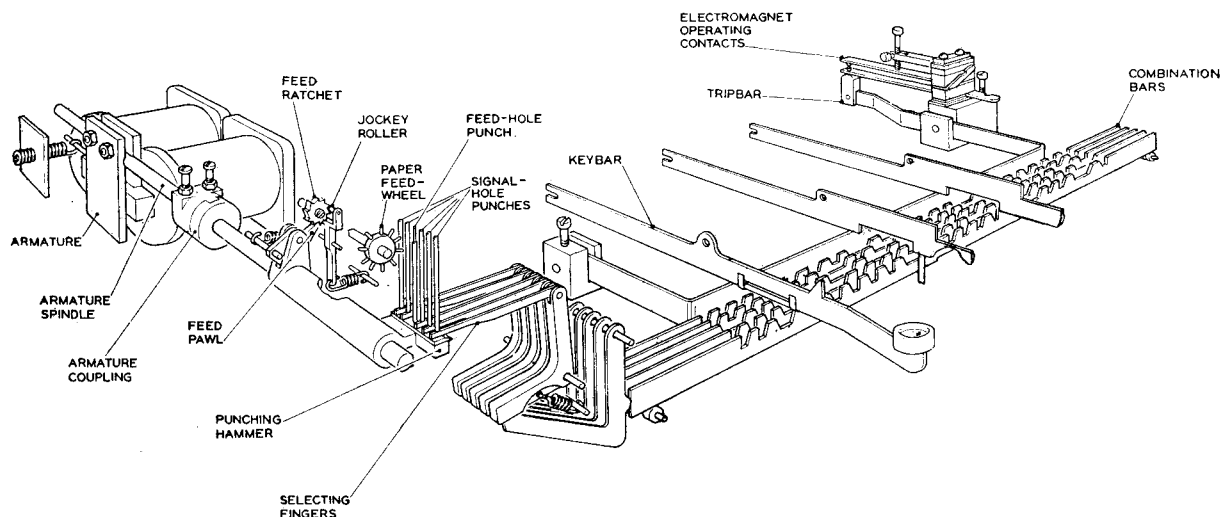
SELECTING AND PUNCHING MECHANISM OF PERFORATOR NO. 44.
